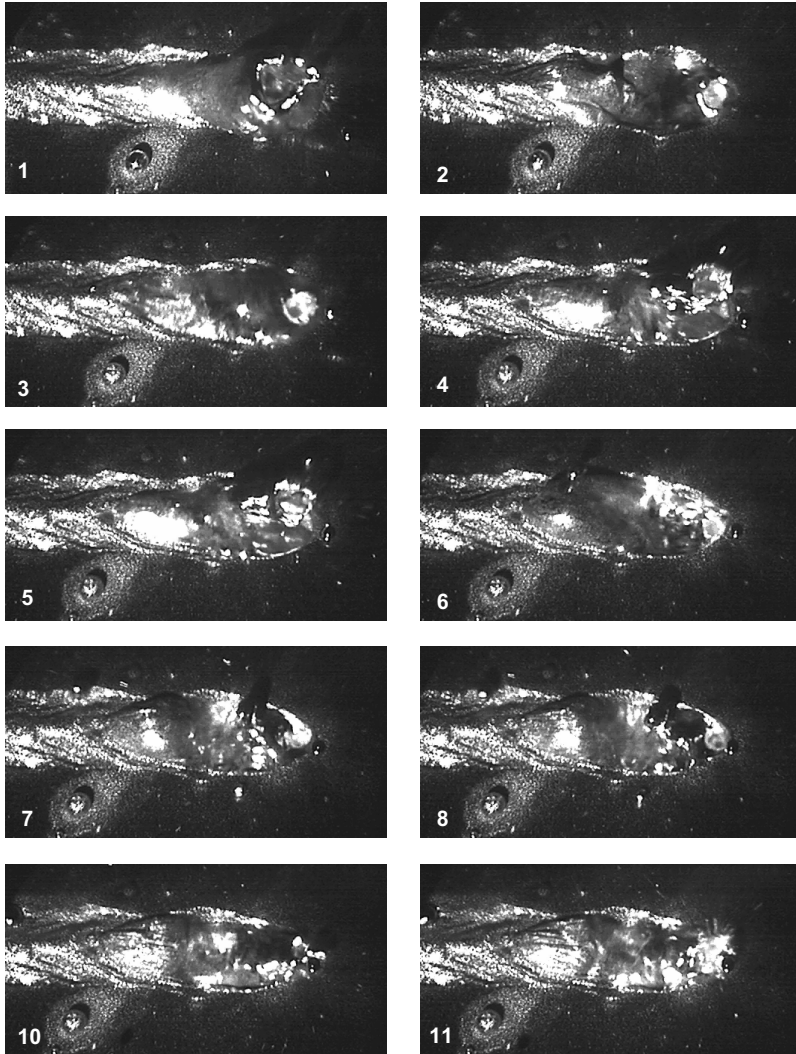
Sequence of high-speed pictures of fibre laser welding; 1000 fps; $P_{\text{fibre}} = 6 \text{ kW}$; $\varphi = 6^\circ$; laser specifications as in figure 4.17; $v_w = 3 \text{ m min}^{-1}$; chamber rinsed with argon before welding; EN AW-50831; bead on plate
